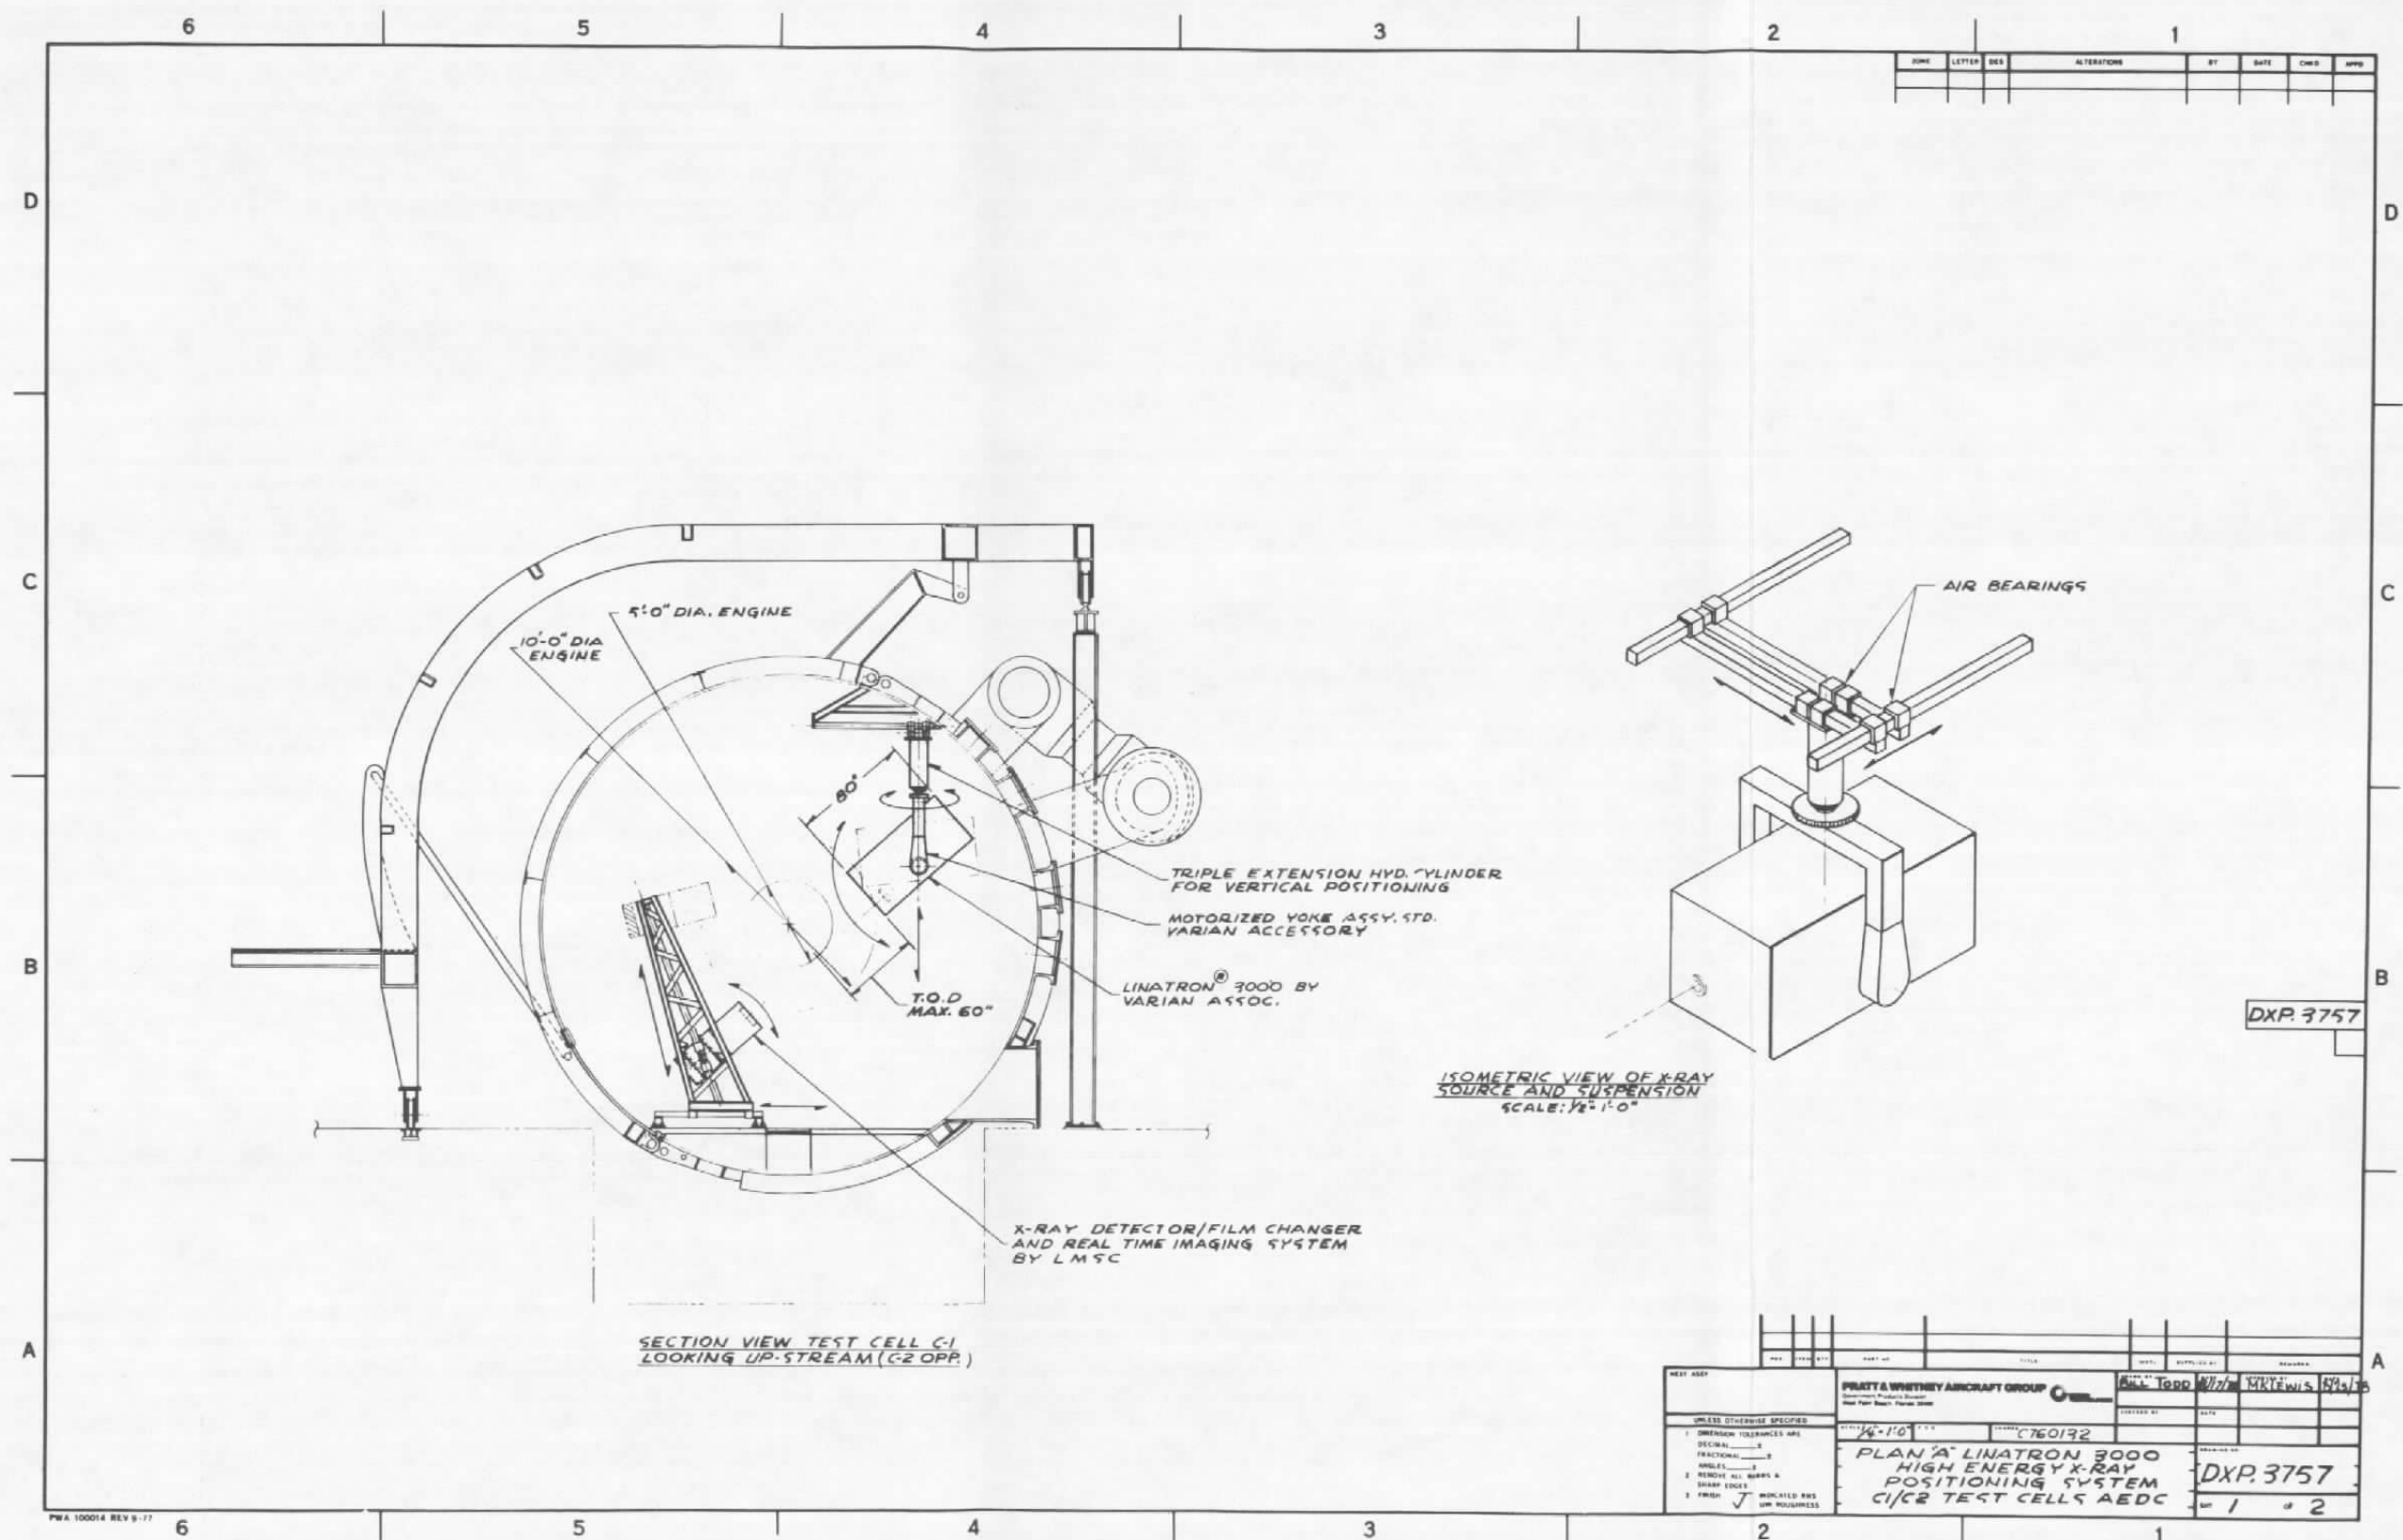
Plan A LINATRON® 3000 Positioning System for C-1/C-2 at AEDC
